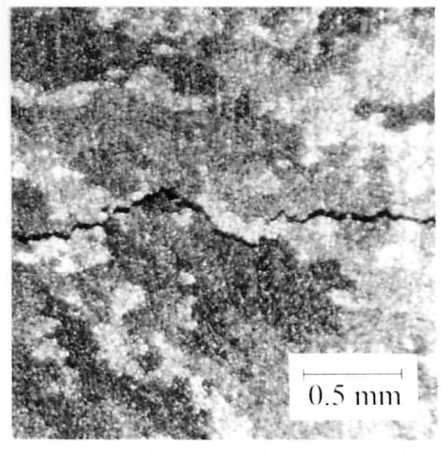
Magnified view of crack in the BN inoculated weld.
